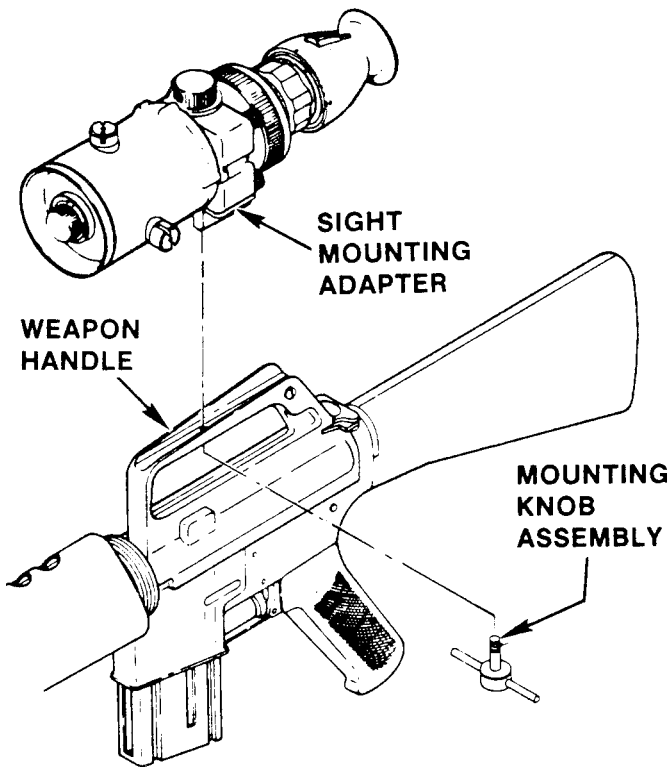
Installation of Mounting Knob Assembly M16A1/A2.
